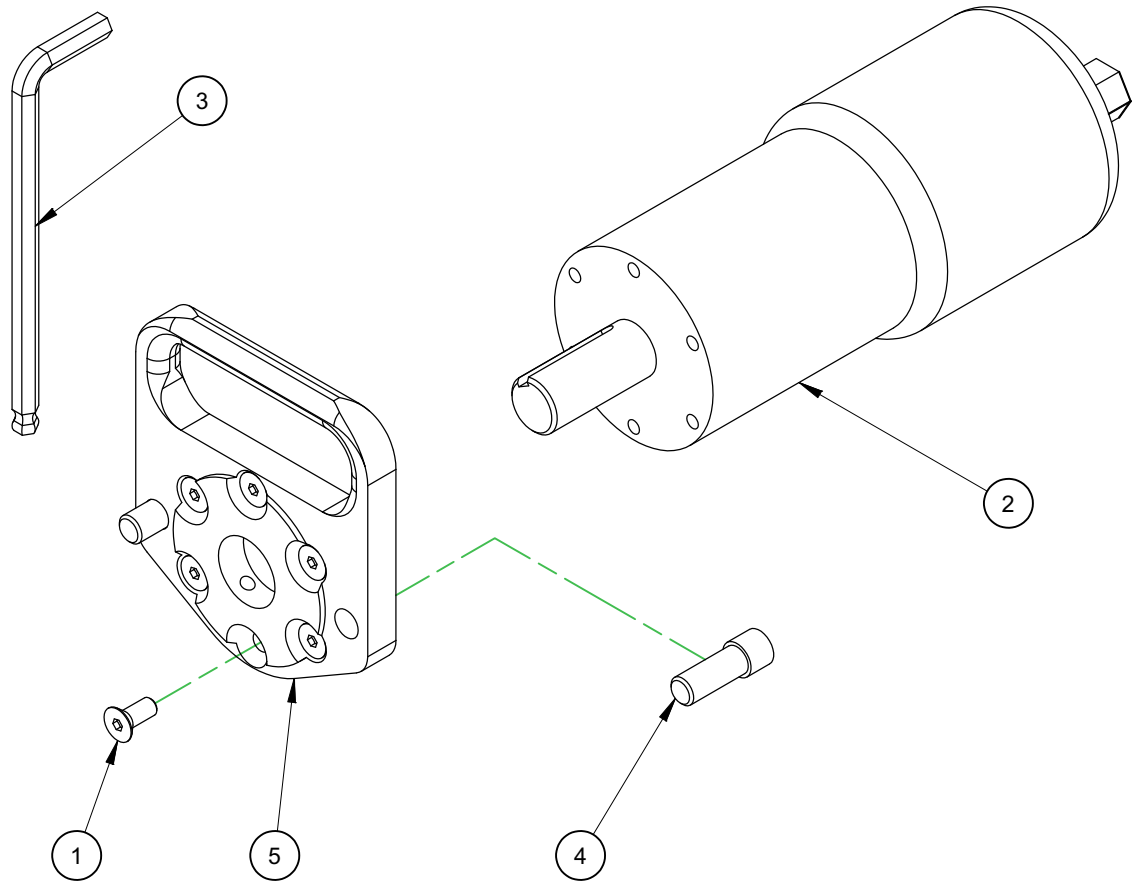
HD AXIAL FEED UNIT ASSEMBLY PARTS LIST (P/N 91518)
